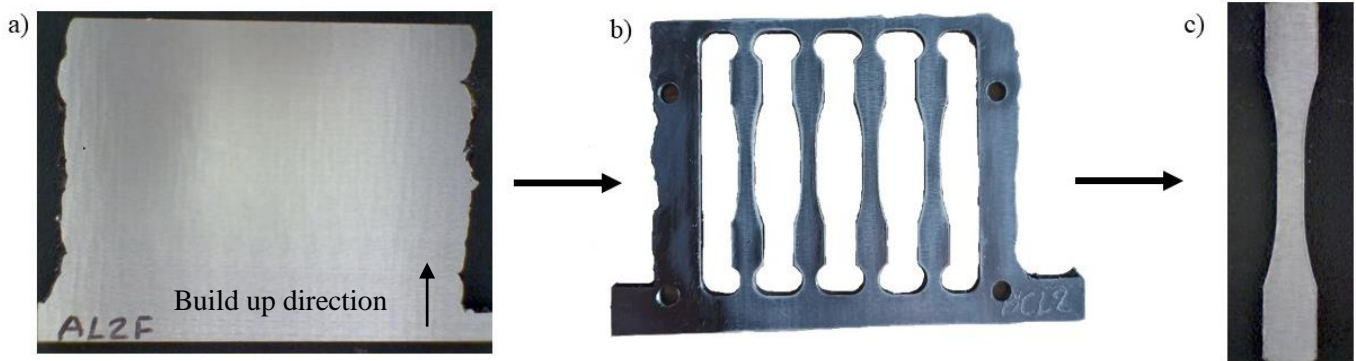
Main steps of manufacturing a specimen for uniaxial tension test: a) Machined slice of the sample; b) Machined slice after milling in CNC machine; c) Final specimen
